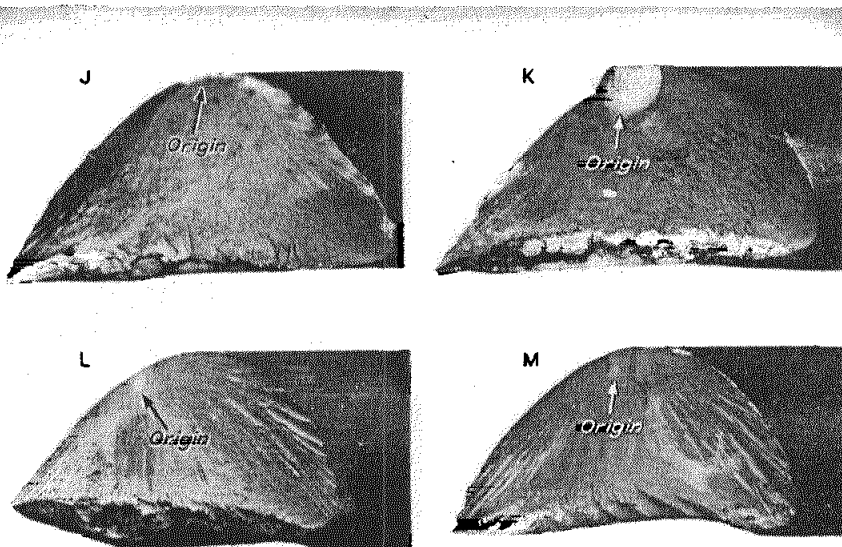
Tensile fatigue fractures in extra hard torsion bars. Specimens failed under torsional loads. These failures originated in various sub-surface defects.
